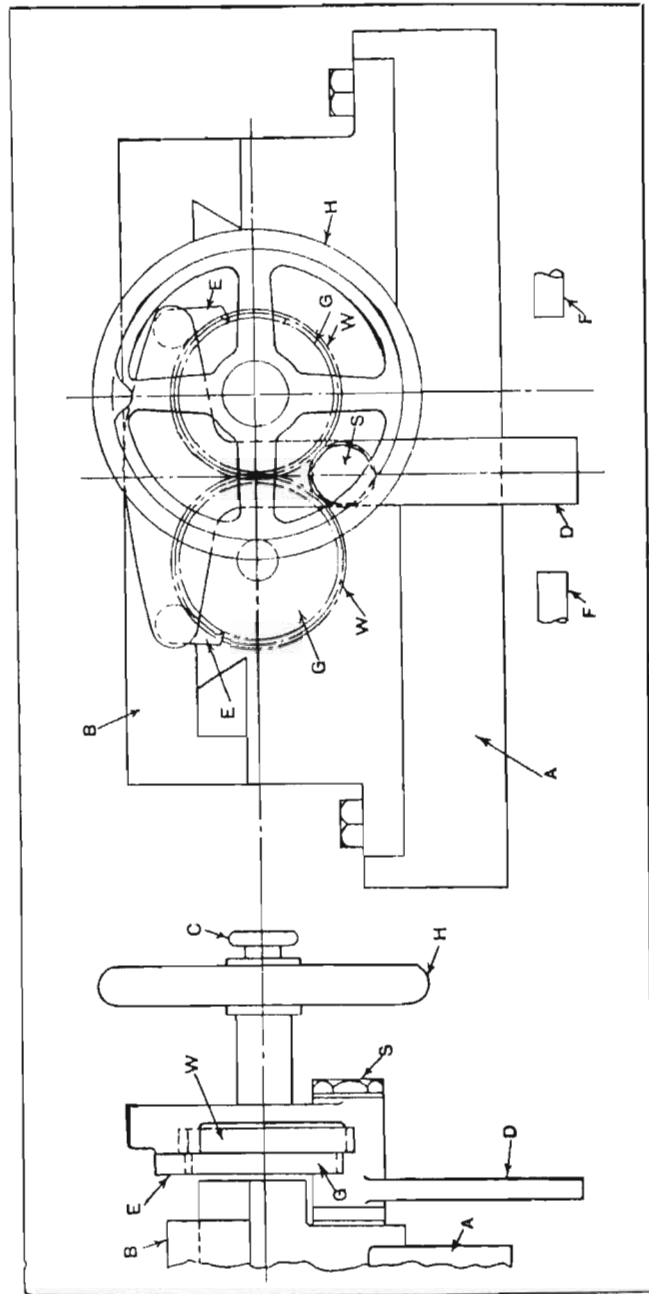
Reciprocating Grinder Table Equipped with Automatic In-feed Mechanism
